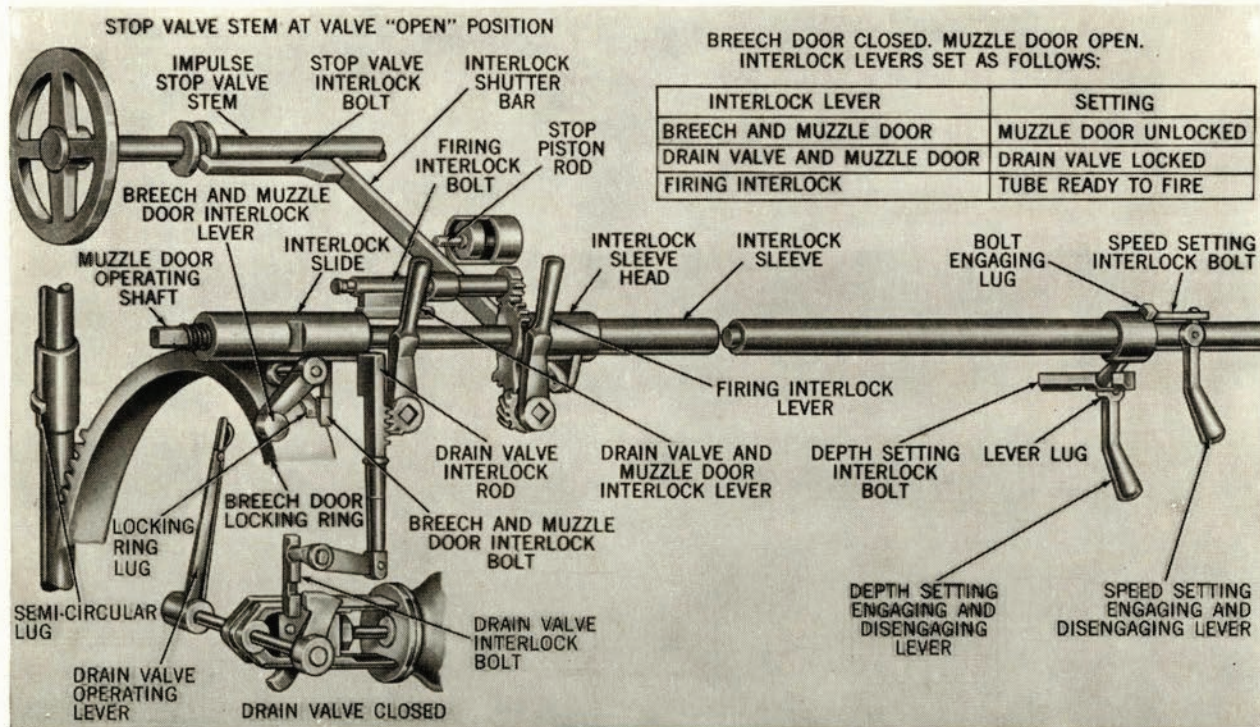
Interlocking Mechanisms—Tube Ready to Fire—Tube Equipped With Hand-Operated Muzzle Door.
